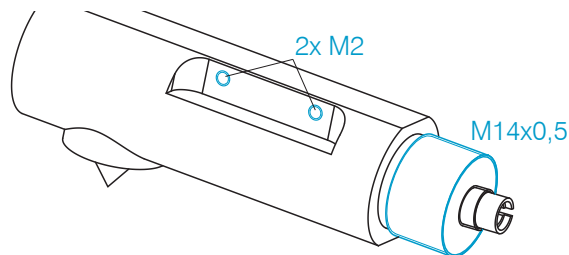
Mounting for series IFS2407/90-0,3 sensors
